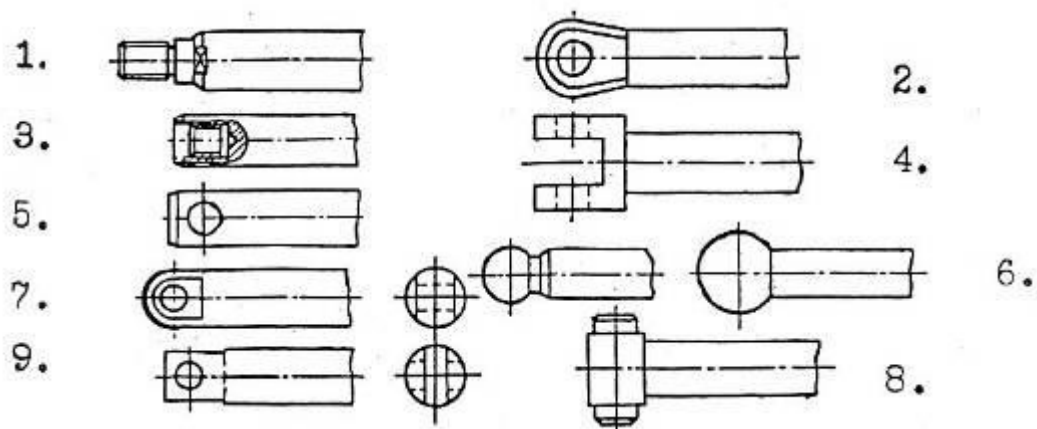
Mounting options for the hydraulic cylinder rod.
